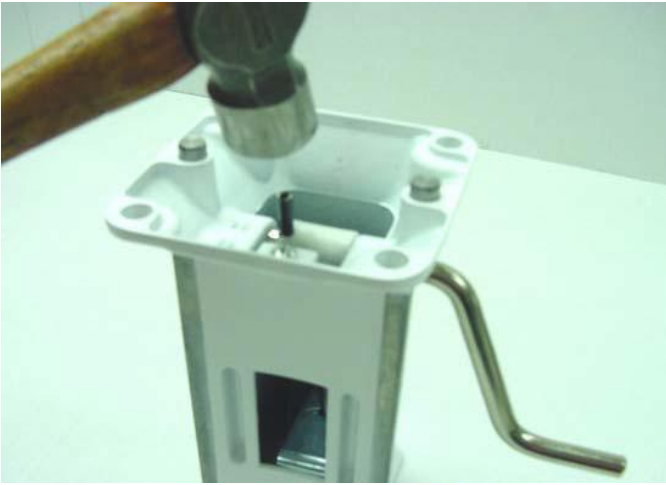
Drive out the roll pin to remove the bowl lift arm.
